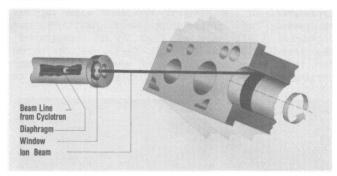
Irradiation of an engine block: precise and uniform labelling on the cylinder bore for wear measurement in the T.D.C. of the first piston ring ("gusset wear").
